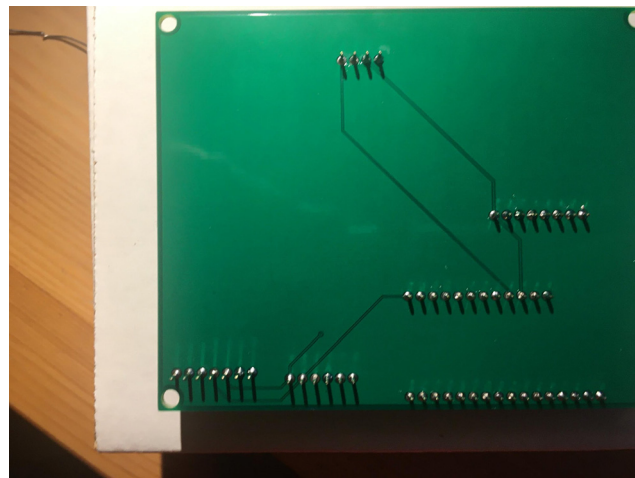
Bottom view after soldering the CO₂ Sensor to the PCB.
